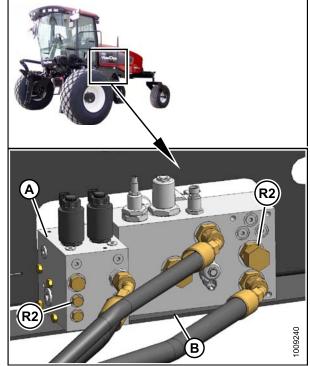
Valve Blocks without Reverser Valve in Factory Configuration
